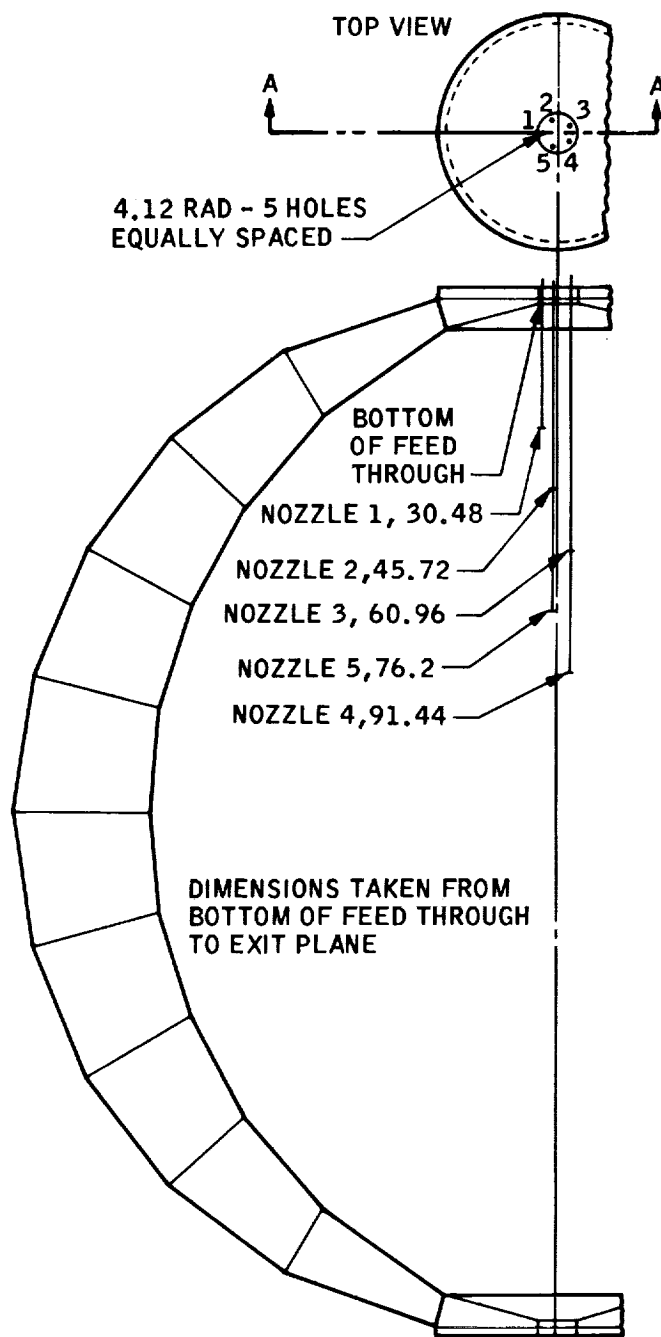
Arrangement of the 5 plenum-nozzle assembly units in the Molsink
